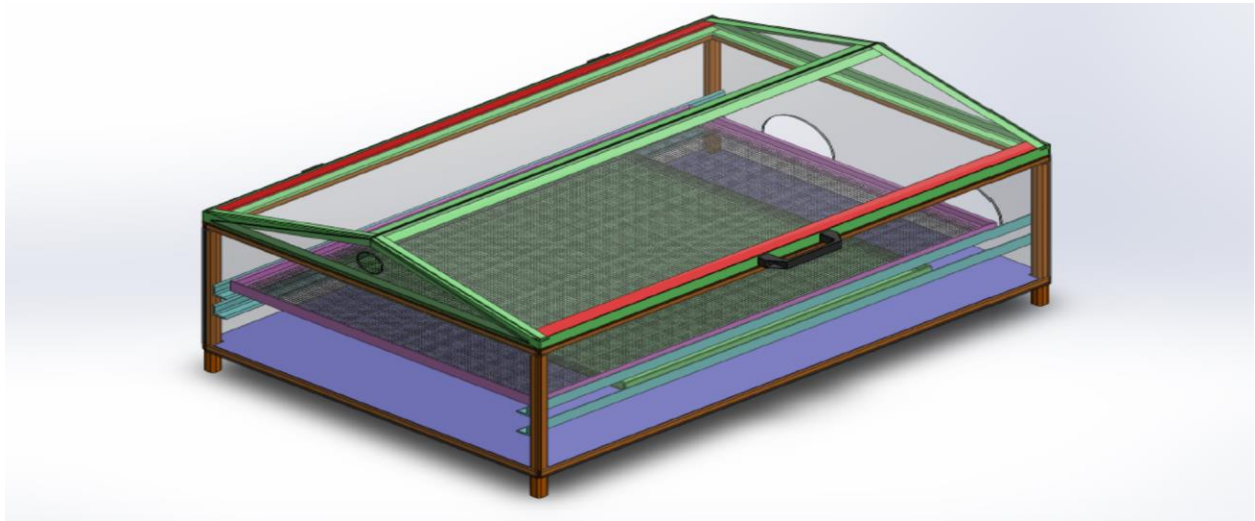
Detailed Assembly of Modified Solar Greenhouse prototype
